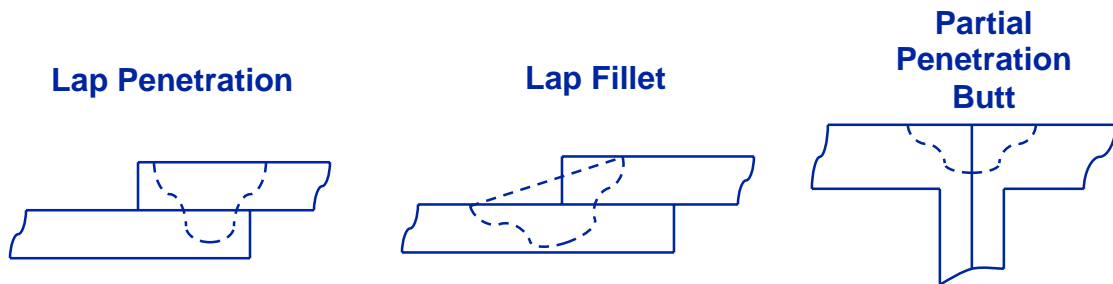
Lap Penetration, Lap Fillet, and Partial Penetration Butt Weld Joint Configurations (Friction Stir Weld Nugget Indicated by Dashed Lines)
